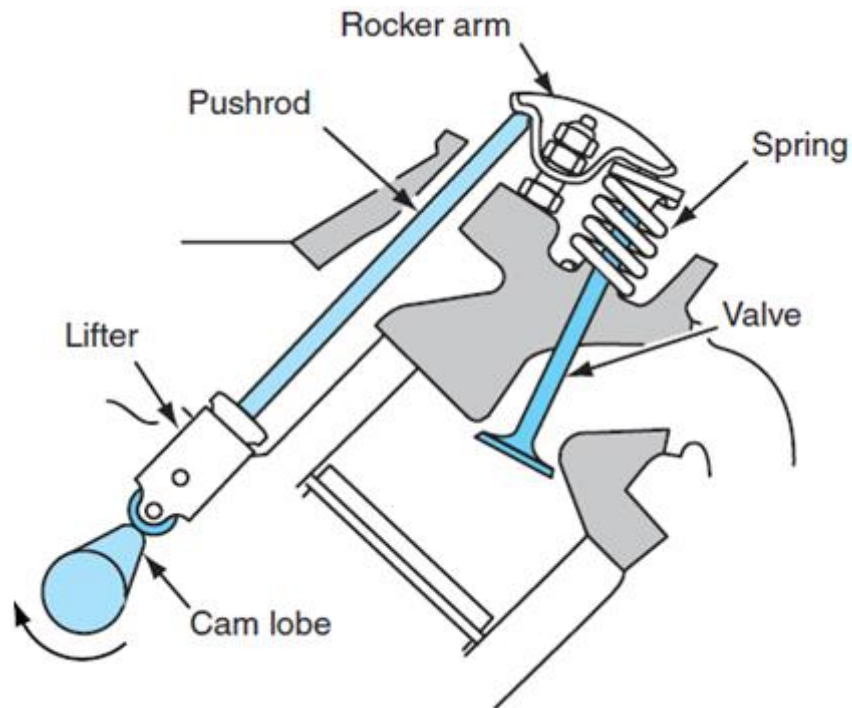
Cam-in-block valve design (Automotive Engineering, 2013)
